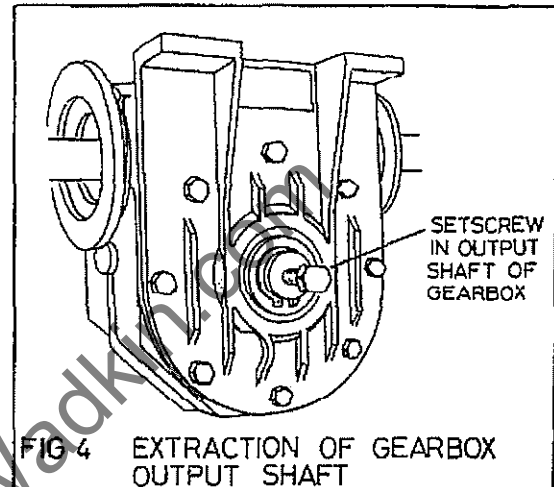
EXTRACTION OF GEARBOX OUTPUT SHAFT
